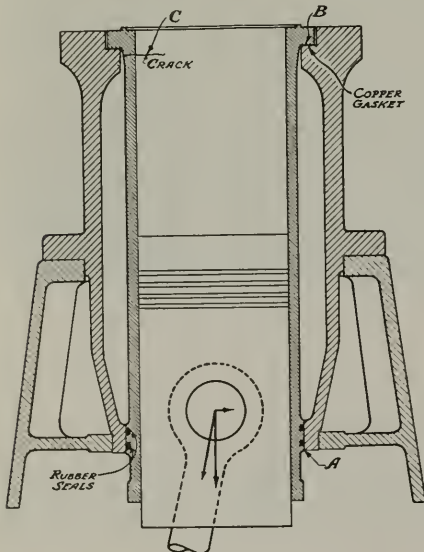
Typical design of removable cylinder liner showing the usual method of liner support in the cylinder block.
